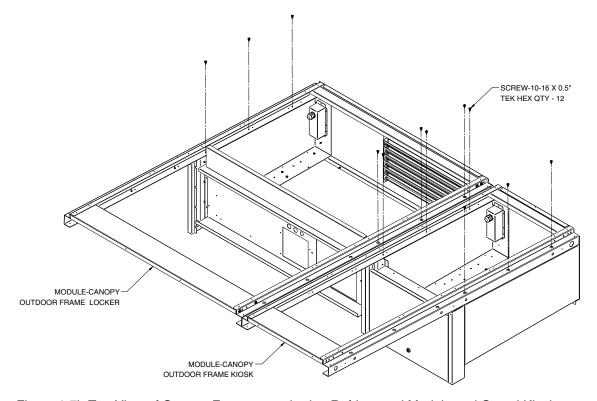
Top View of Canopy Frames attached to Refrigerated Module and Contol Kiosk
